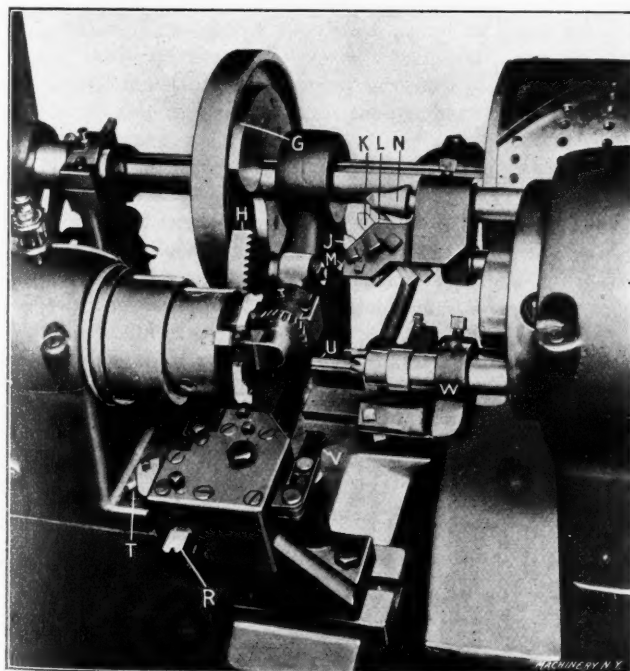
Cleveland Automatic Chucking Machine Set up for Machining Sewing Machine Handwheel
